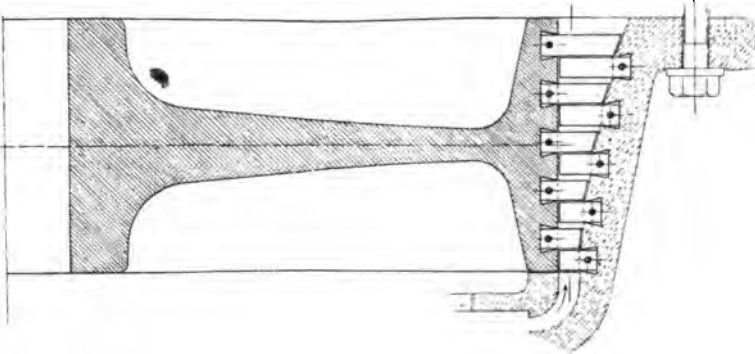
Low-pressure Wheel and Parsons Blading of Union Steam Turbine.
